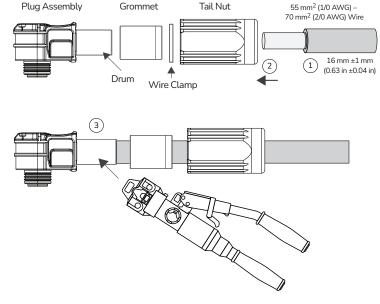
HELIOS ESS Battery Cable Terminal Connector Assembly
